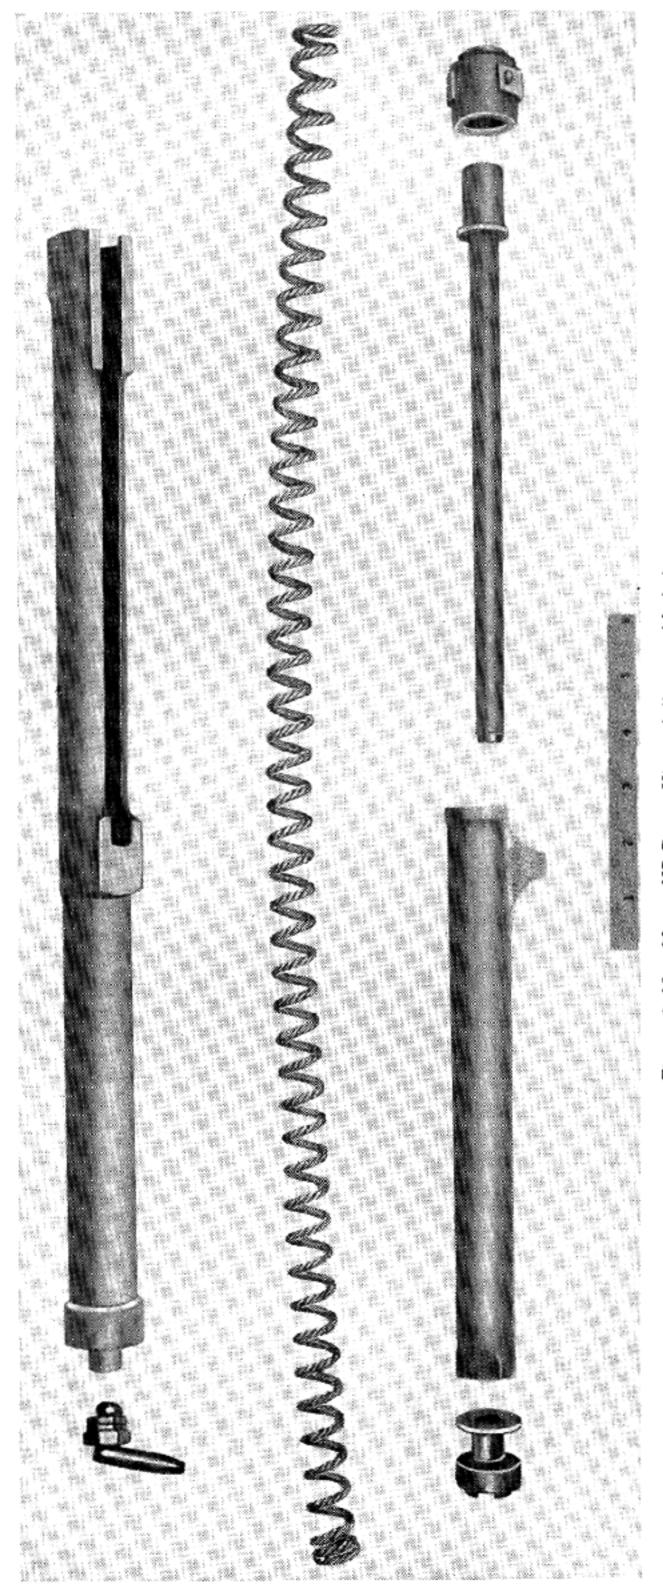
25. 23-mm NS Gun. View of disassembled charger.
